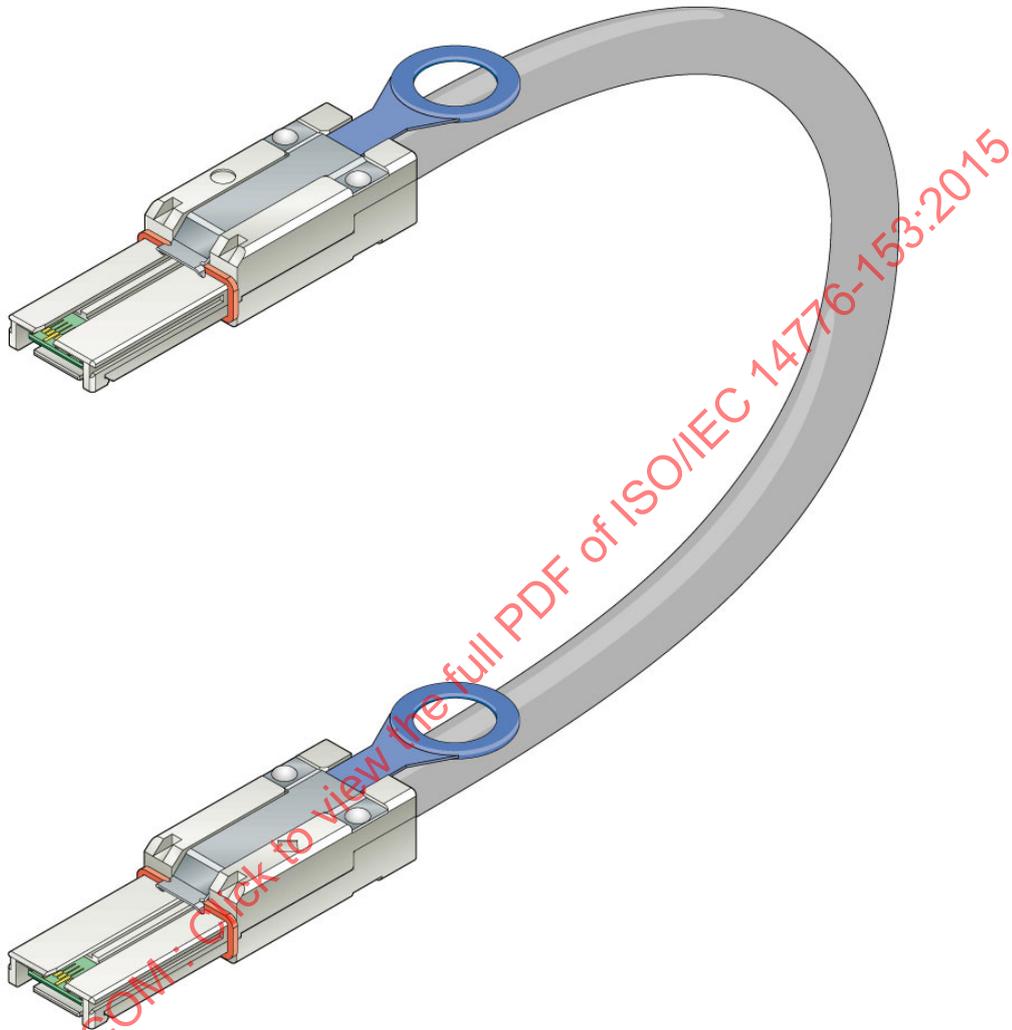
SAS external cable assembly with Mini SAS 4x cable plug connectors
